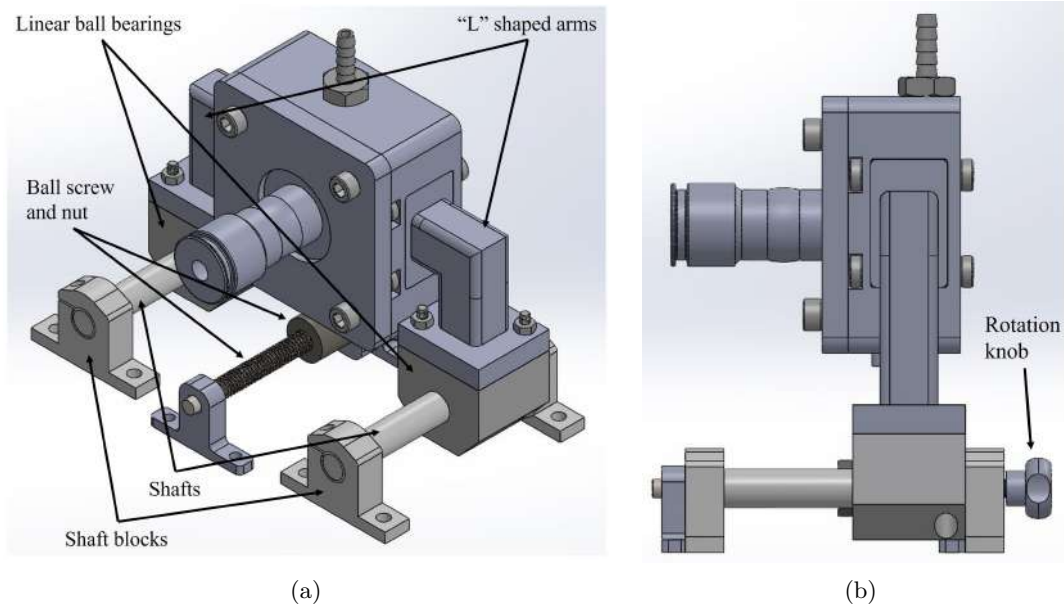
Extension mechanism. Allows for the inlet fixation part to have movement in the direction of the outlet fixation part. (a) Shaft blocks hold the shafts in place and are screwed to the workstation. (b) The knob connected to the screw allows for the manual rotation.
